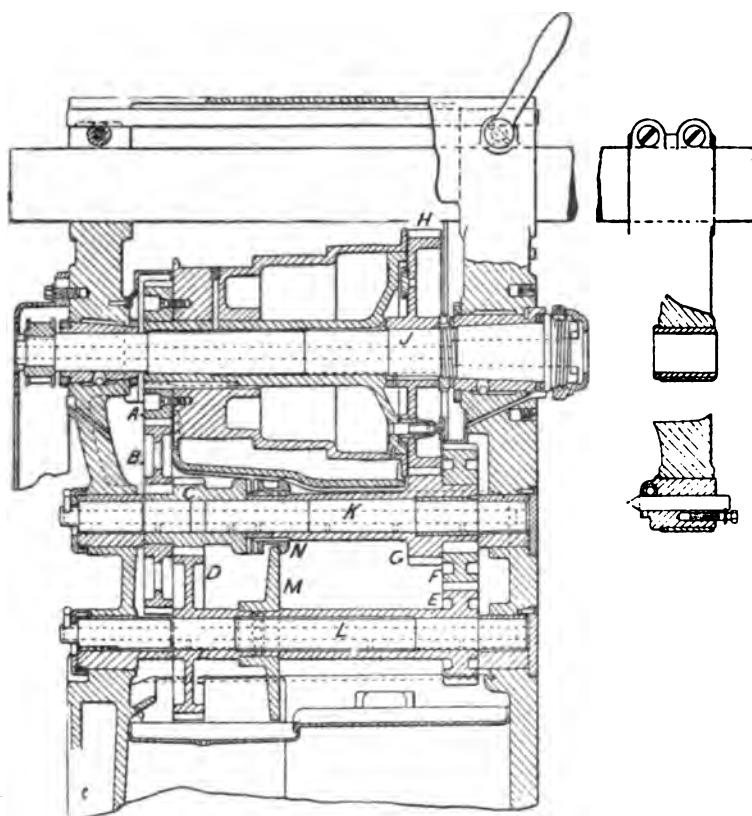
Vertical Section through Spindle and Back Gears, No. 5 Plain Milling Machine. (Brown & Sharpe Manufacturing Co.)
